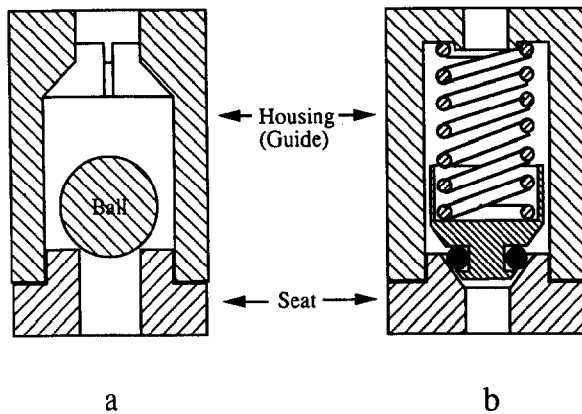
Typical check valve designs: (a) hard-seated, and (b) soft-seated.
